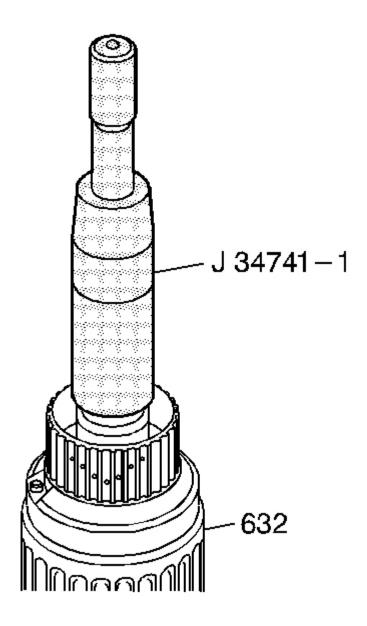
Installing J 34741-1 Into The Input Clutch Housing Courtesy of GENERAL MOTORS CORP.
